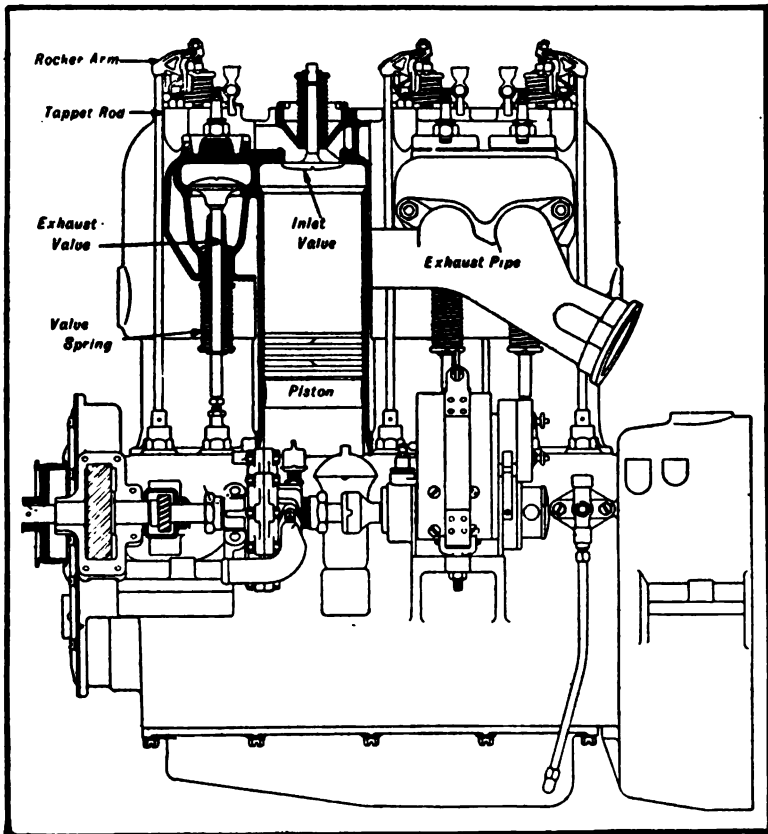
Part sectional view of Bergdoll motor, showing placing of valves. The exhaust member is fitted in a side pocket of the L cylinder. The inlet valve is placed directly in the center of the combustion chamber.
